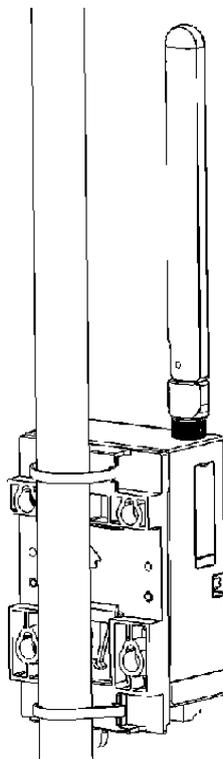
Pole Mount Bracket Installation (Rear View)
